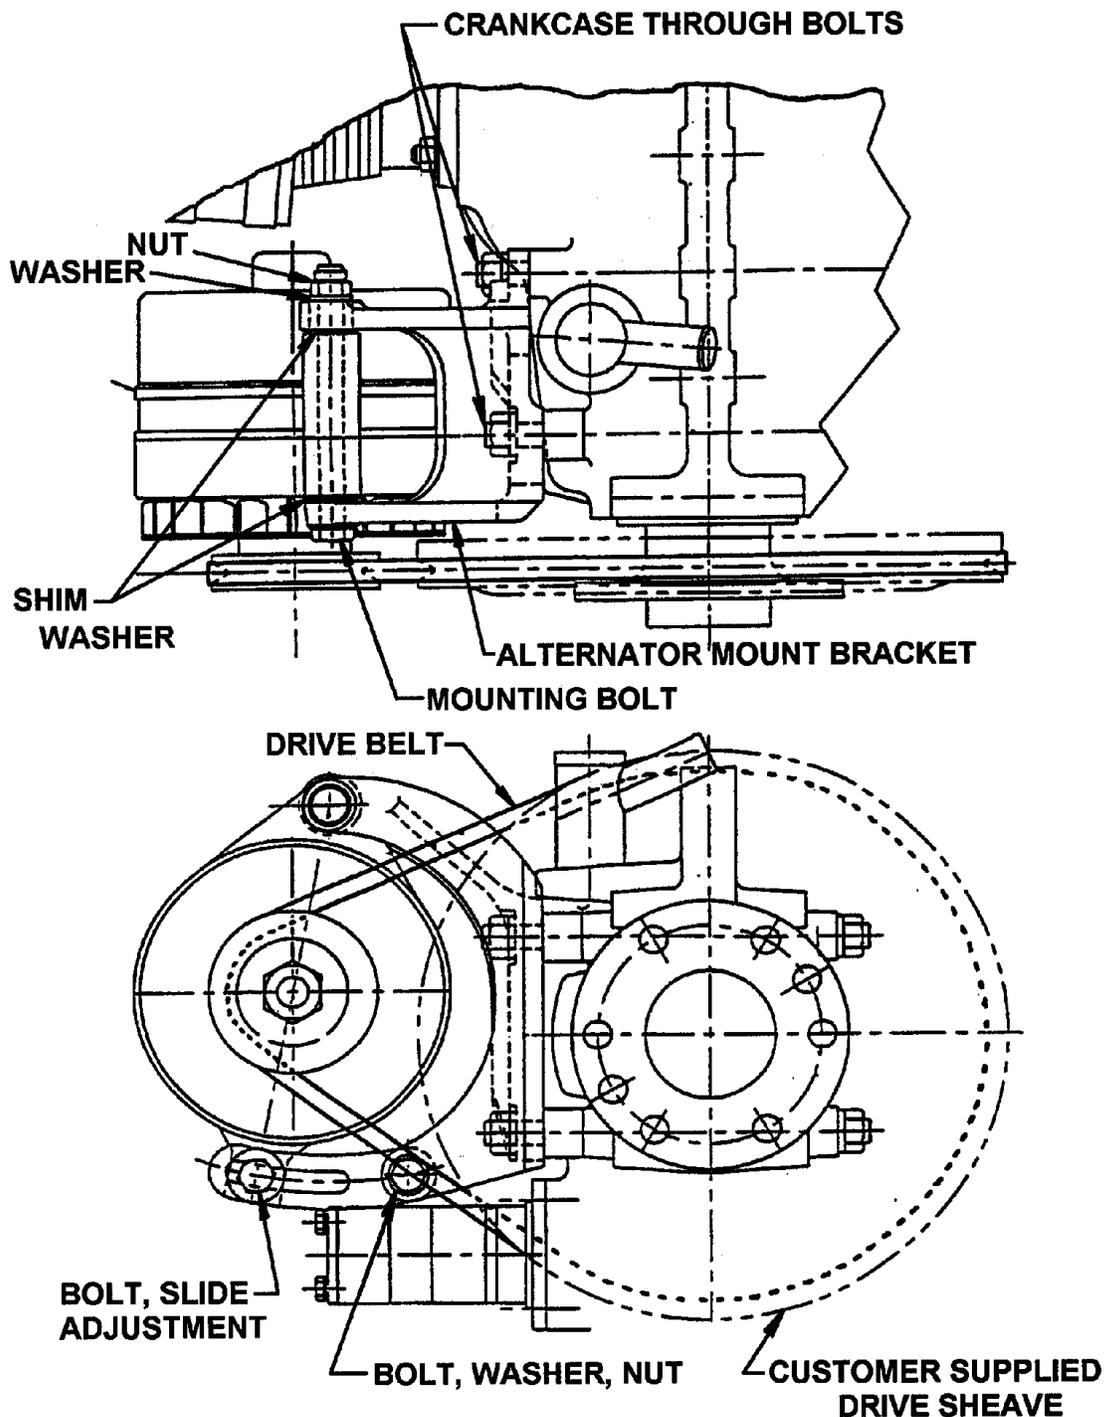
BELT DRIVEN ALTERNATOR
